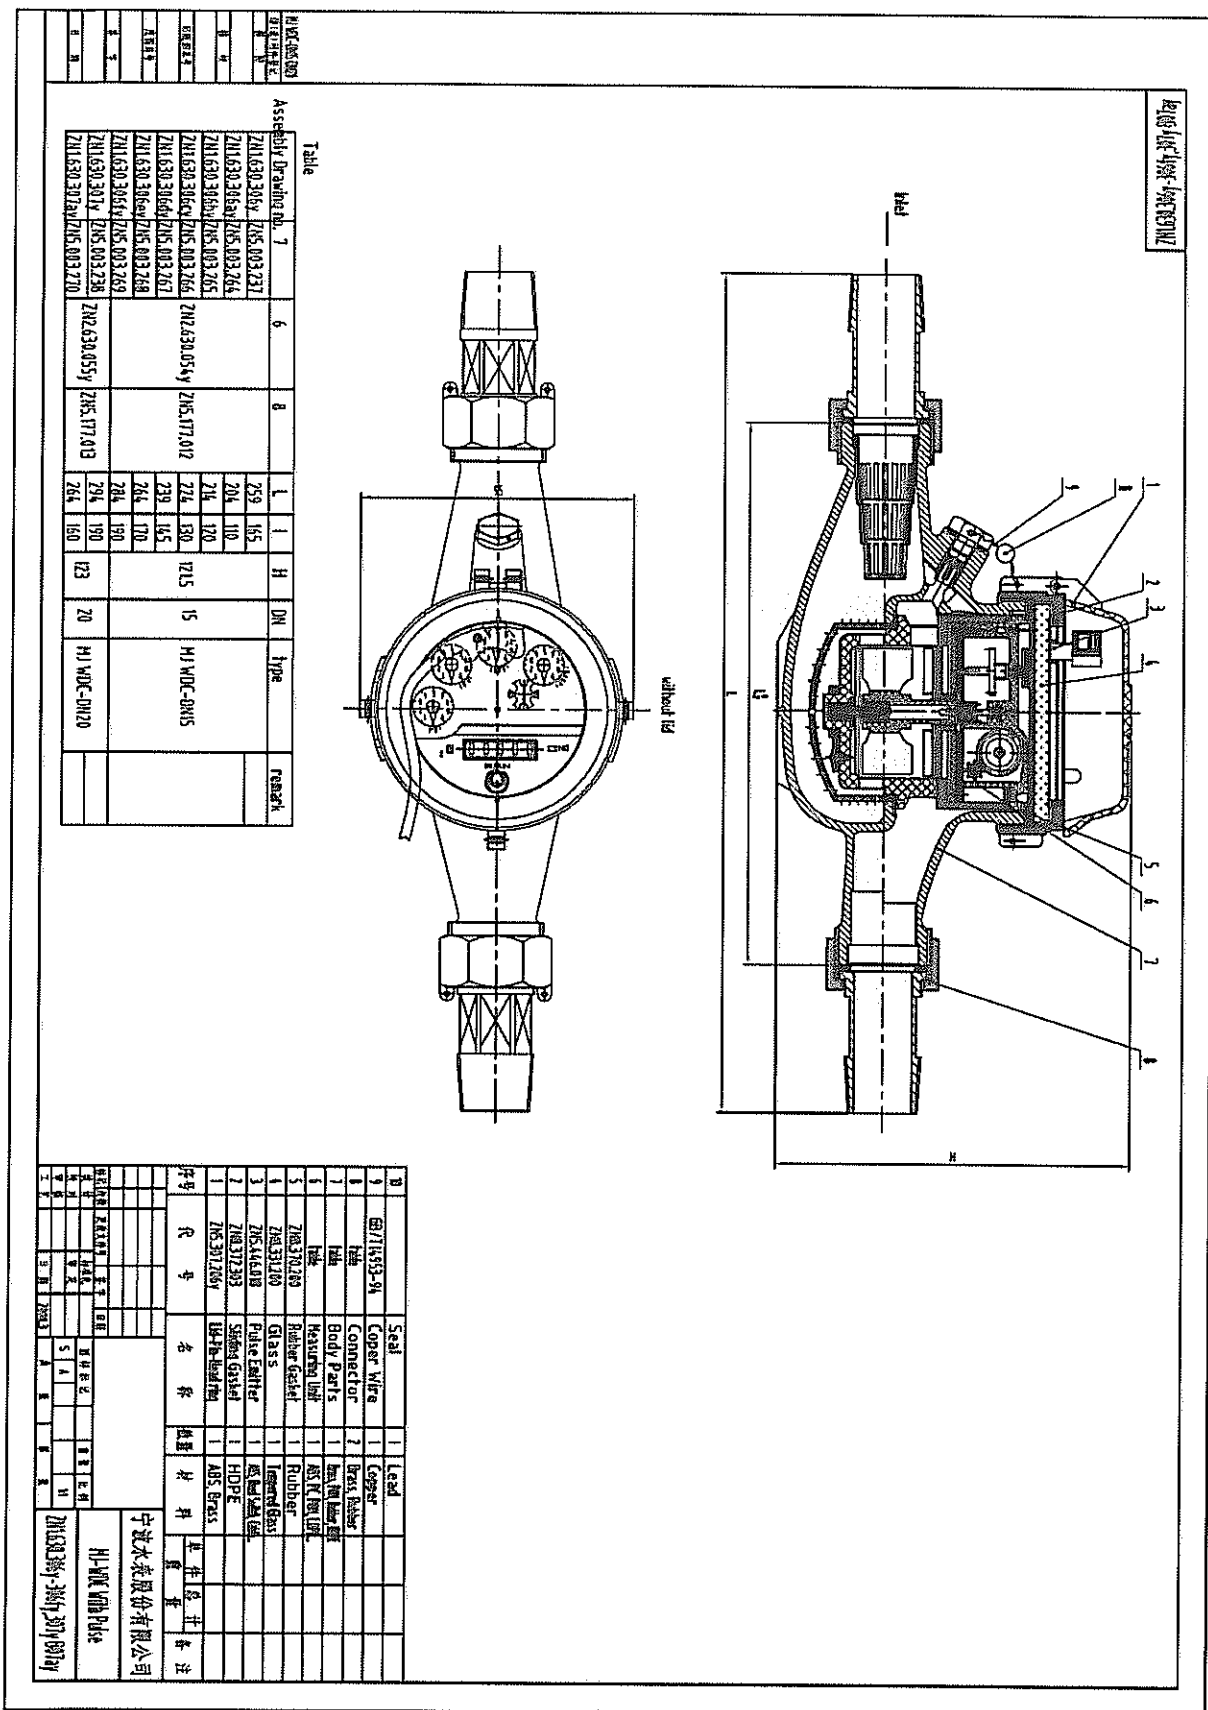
The water meter type MJ-LFC with plastic body assembly drawings:
